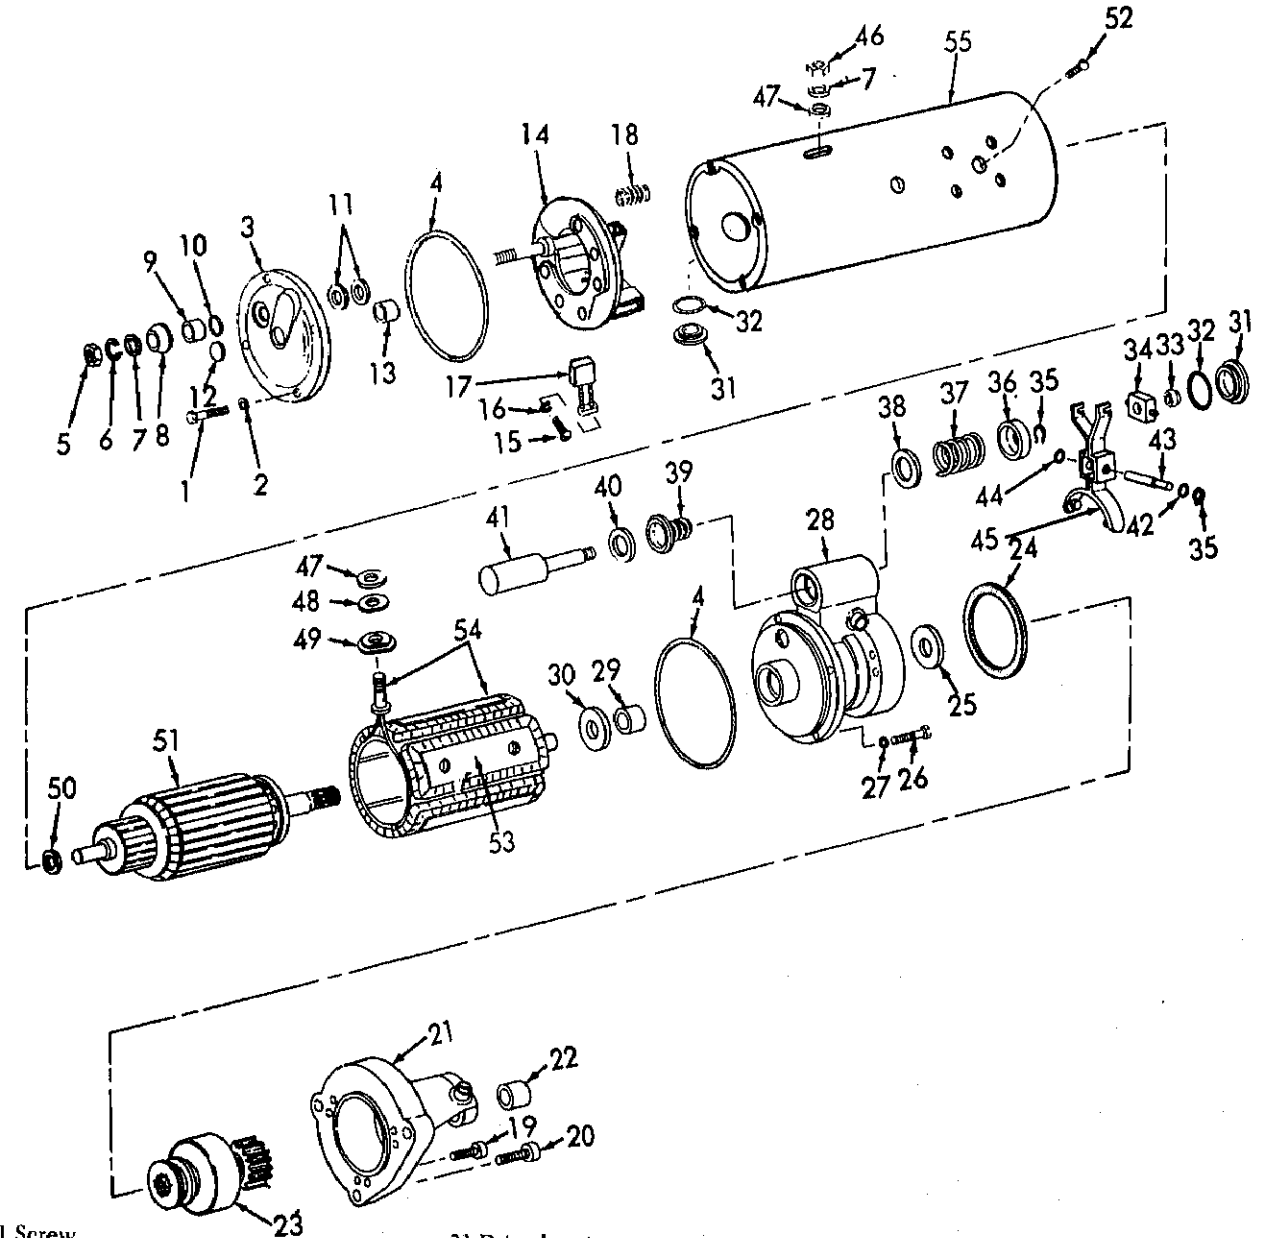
Starter and solenoid, removal, disassembly, reassembly, and installation (sheet 1 of 2).
